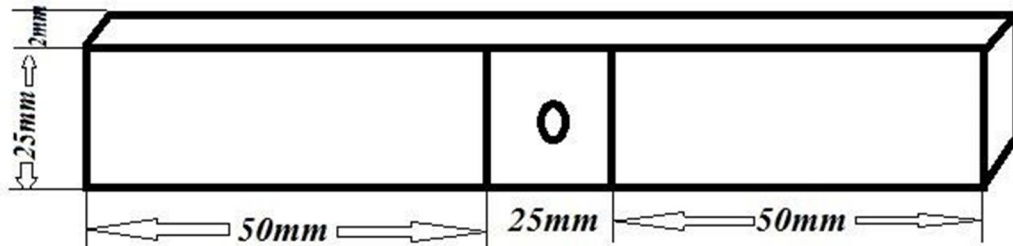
Specimen Dimensions (all dimensions are in mm)
